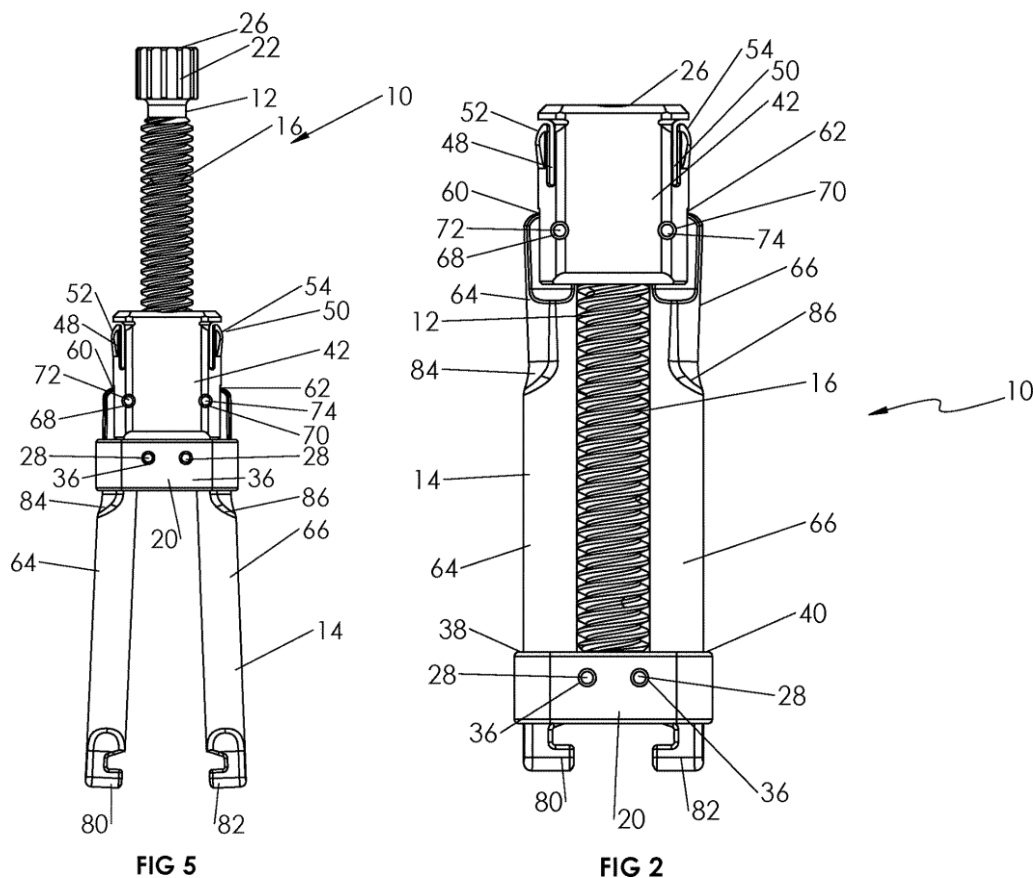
shows a front view of an embodiment of the device before rotation of the screw shaft 16. *Id.* at 3:33-34. The device includes two opposed, elongated "grasping members" 64 and 66. (*See id.* at 5:58-67; FIGS. 2, 5). At the bottom (*i.e.*, distal end) of the screw shaft 16 is a "rod contact member" 20. *See id.* at 4:41-44.
